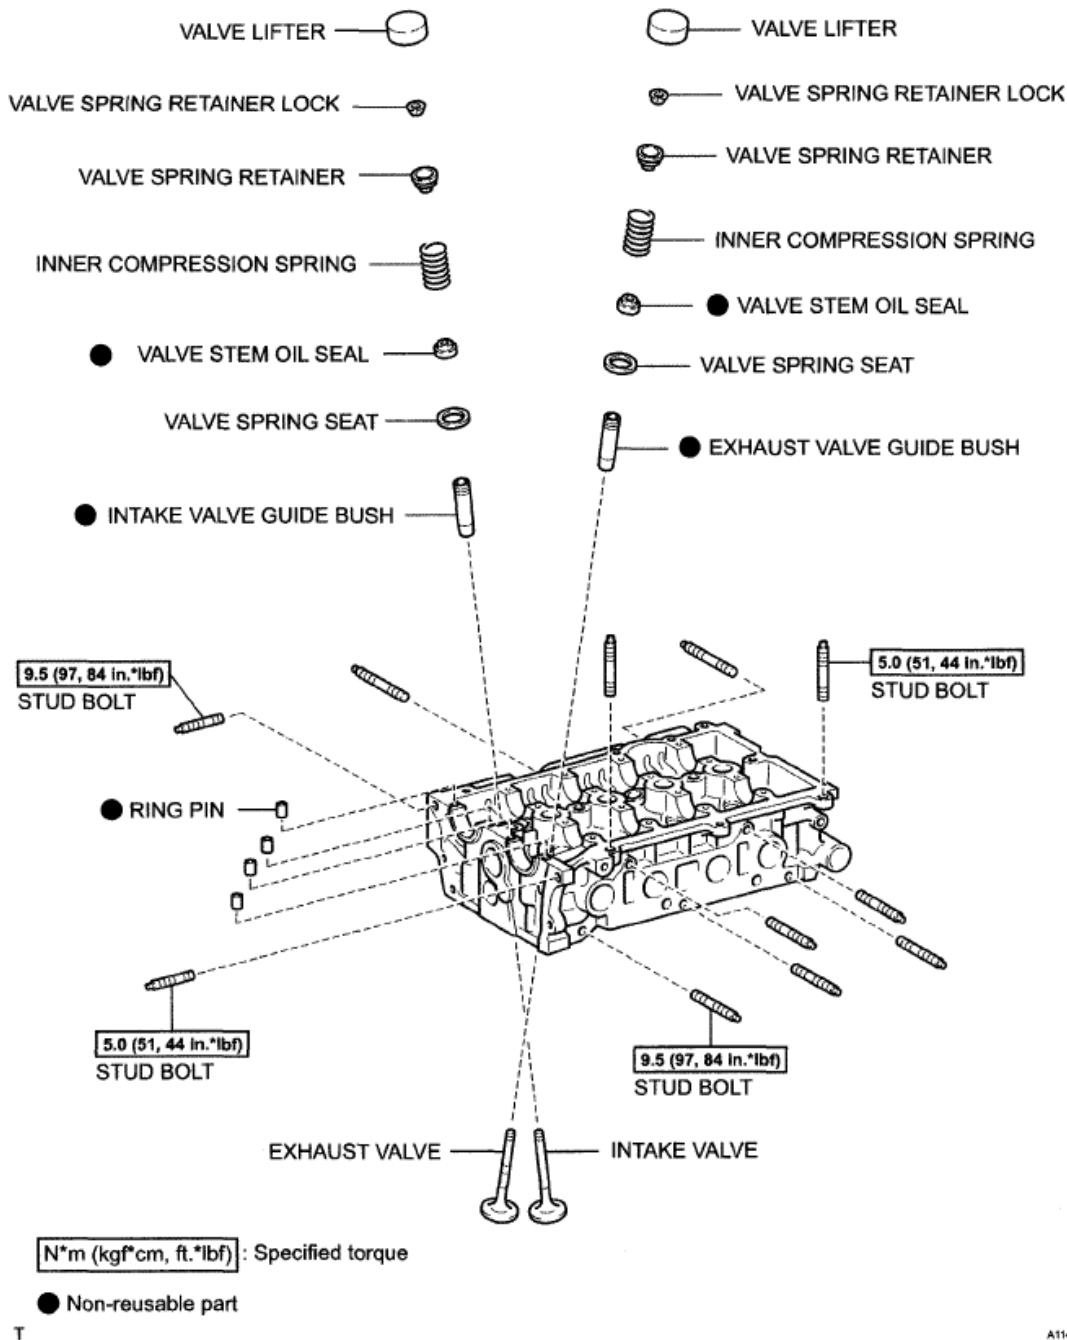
Identifying Cylinder Head Components With Specification (13 Of 13)
